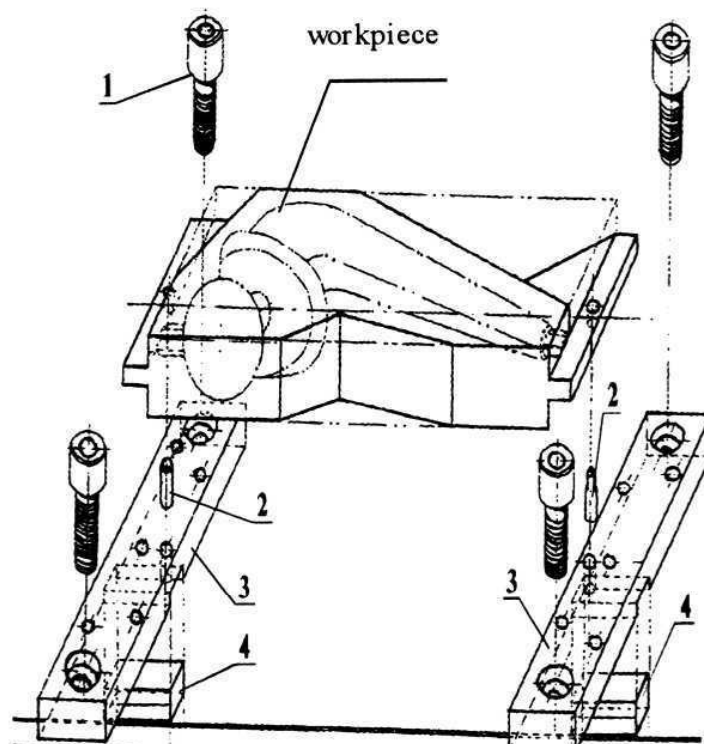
Fixturing system used for endoprosthesis machining (1) fixing screws (2) locating pins; (3) bearing strip;(4) block for bearing strip(Werner *et al.*, 2000)
